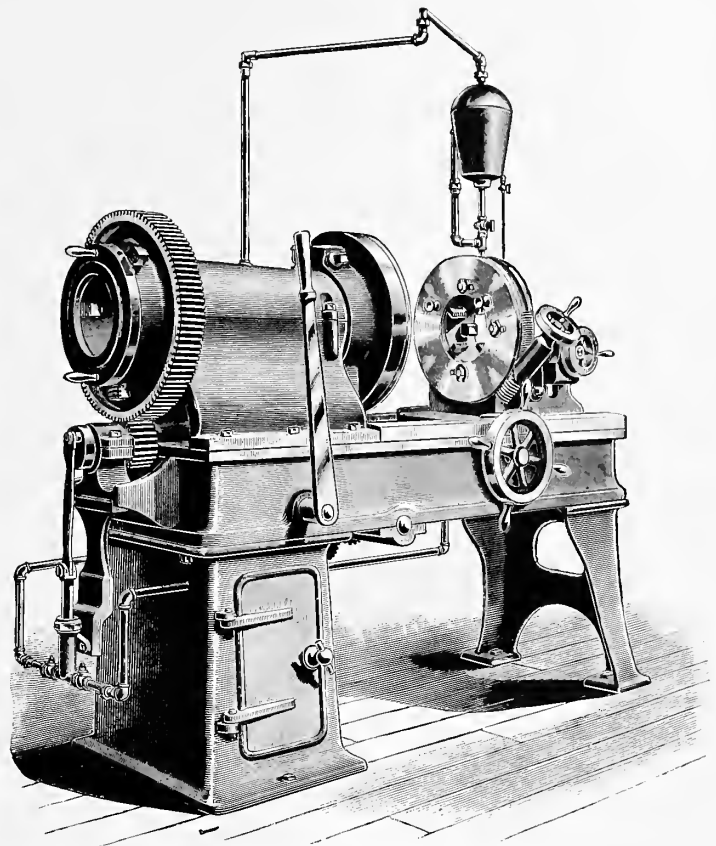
JARECKI POWER MACHINE, No. 9.
